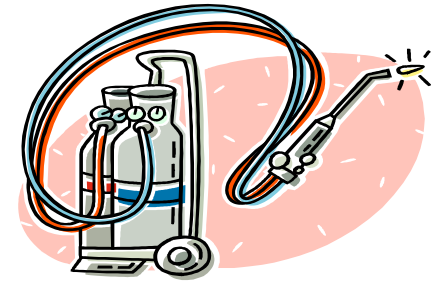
Oxy-acetylene welding unit with flashback arrestors.
